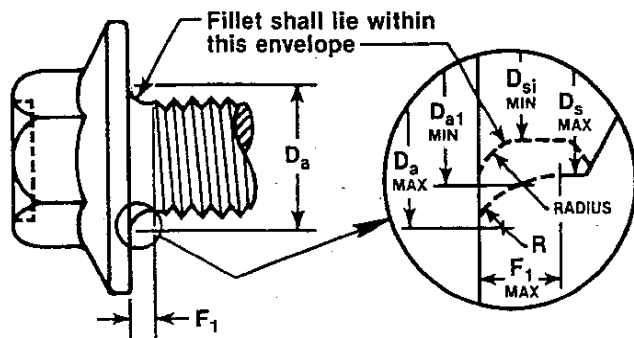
STYLE 'A' FILLET DETAIL FOR SHORT SCREWS
